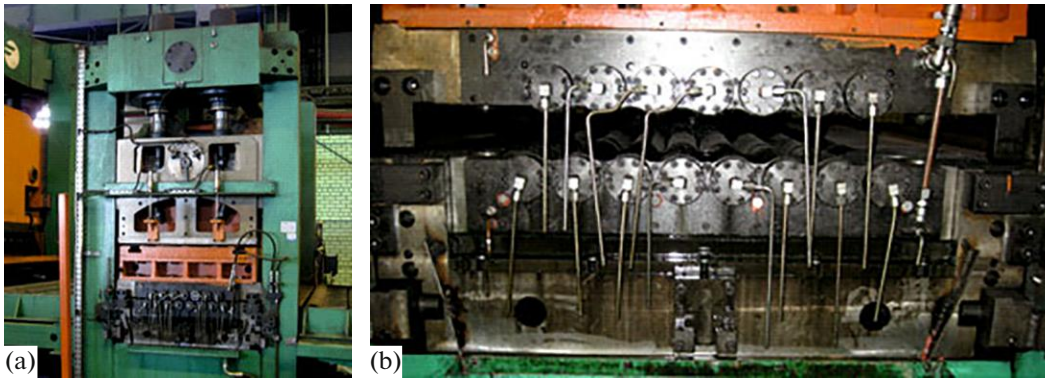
Fifteen-roller Fagor Arrasate straightening machine: (a) general view; (b) working rollers.
